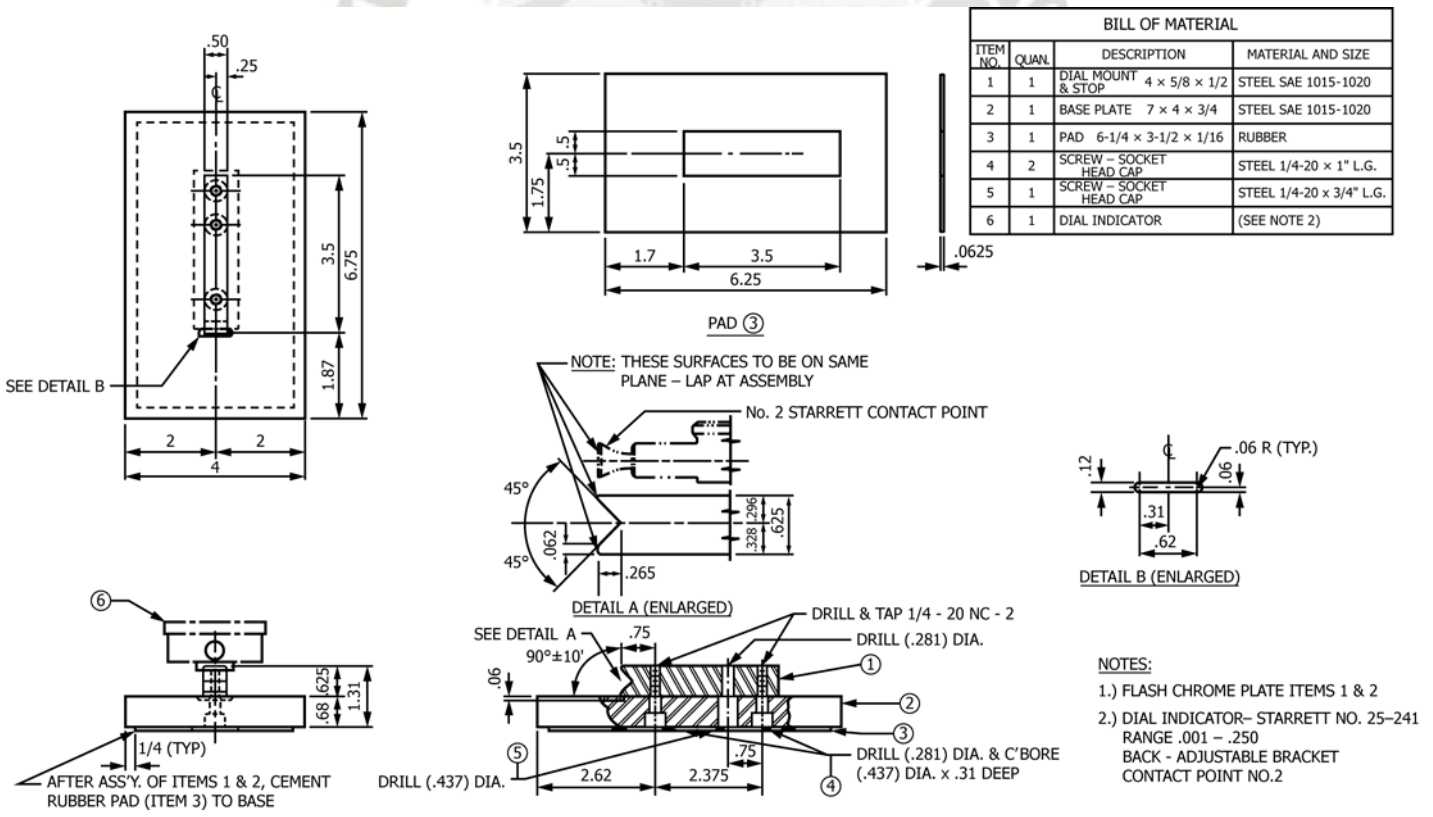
Assembly and Details for Lateral Expansion Gauge
